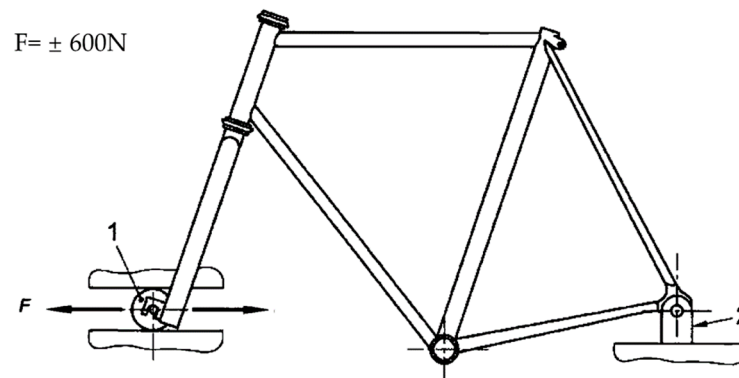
Fatigue test with horizontal forces, with 1 indicating the free-running guided roller and 2 the rigid, pivoted mounting for rear axle attachment point [12].
